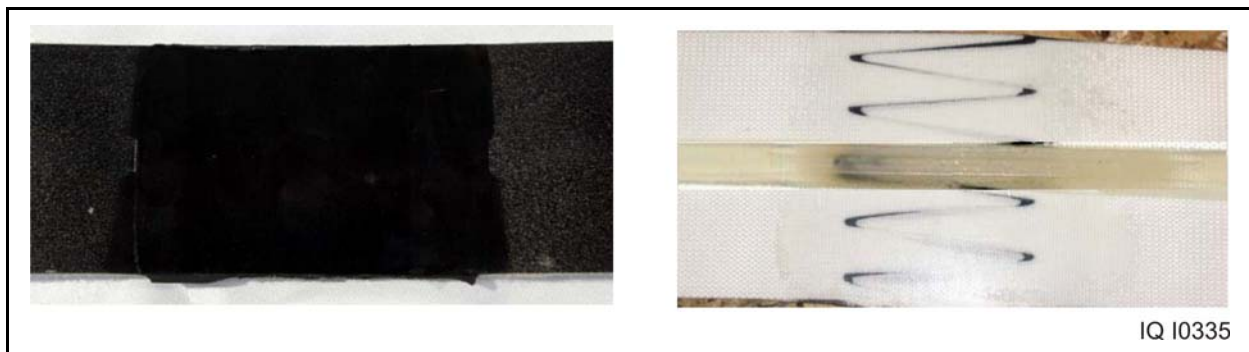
11 Top and Bottom Views of Welded Belt Splice
